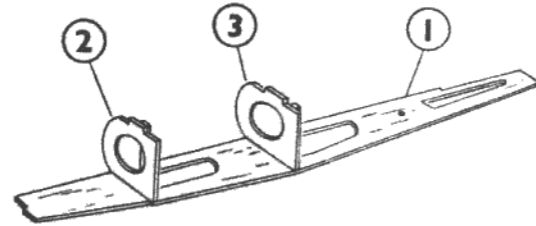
FUSELAGE SIDES ASSEMBLED TOGETHER.
